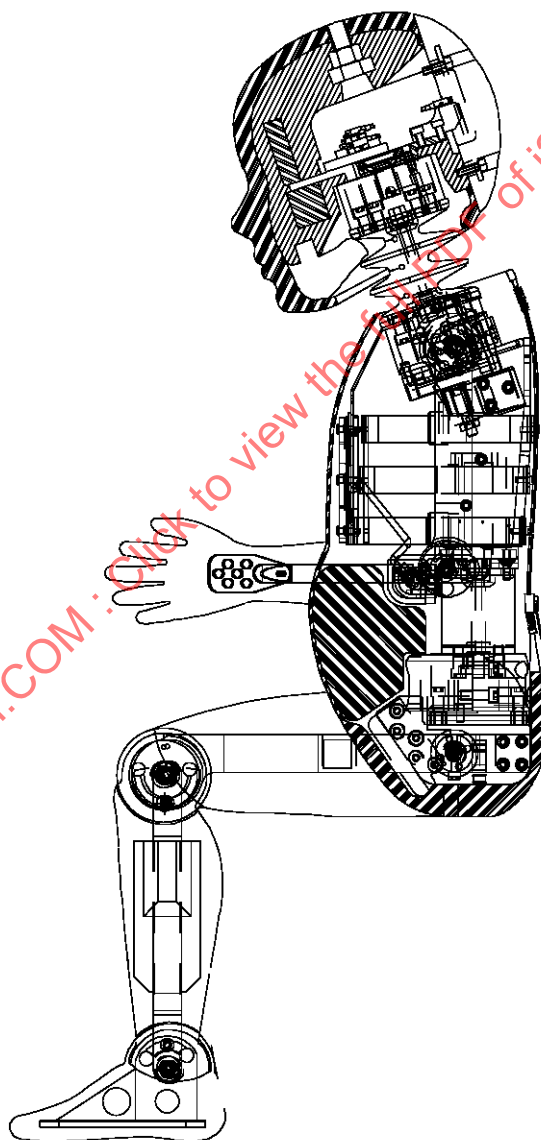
SIDE VIEW H3-3YO ASSEMBLY
